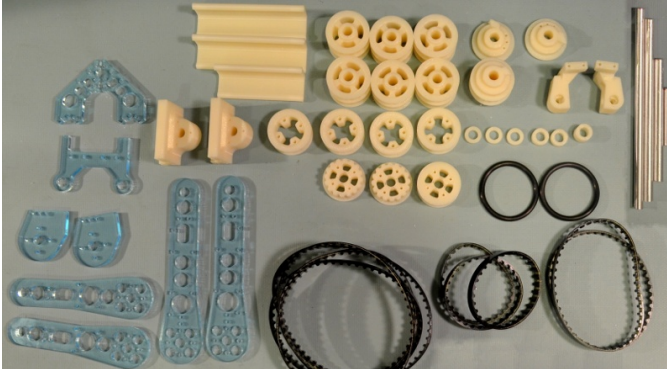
Laser cut acrylic arm parts (left, blue), 3D printed ABS parts (top, white), hand-cut aluminum shafts (upper right), and standard off-the-shelf drive belts (lower right).
